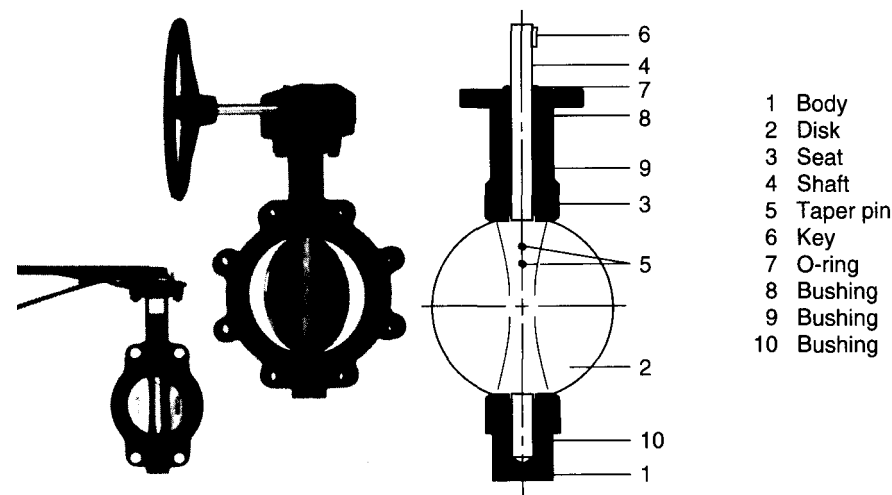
Butterfly valve. Courtesy Crane Company.
